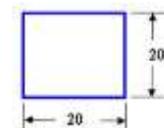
Dimensions of hardness test specimen (All dimensions are in mm)
